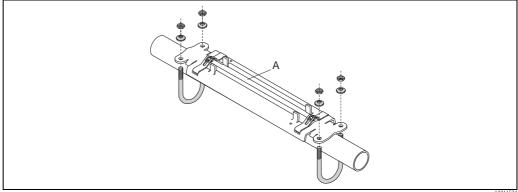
Mounting the Prosonic Flow-sensor holder (DN 15 to 65 / ½ to 2½") with U-shaped screws
